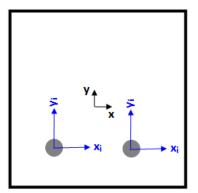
Geometry of square plate with two spot weld joints and design variables
